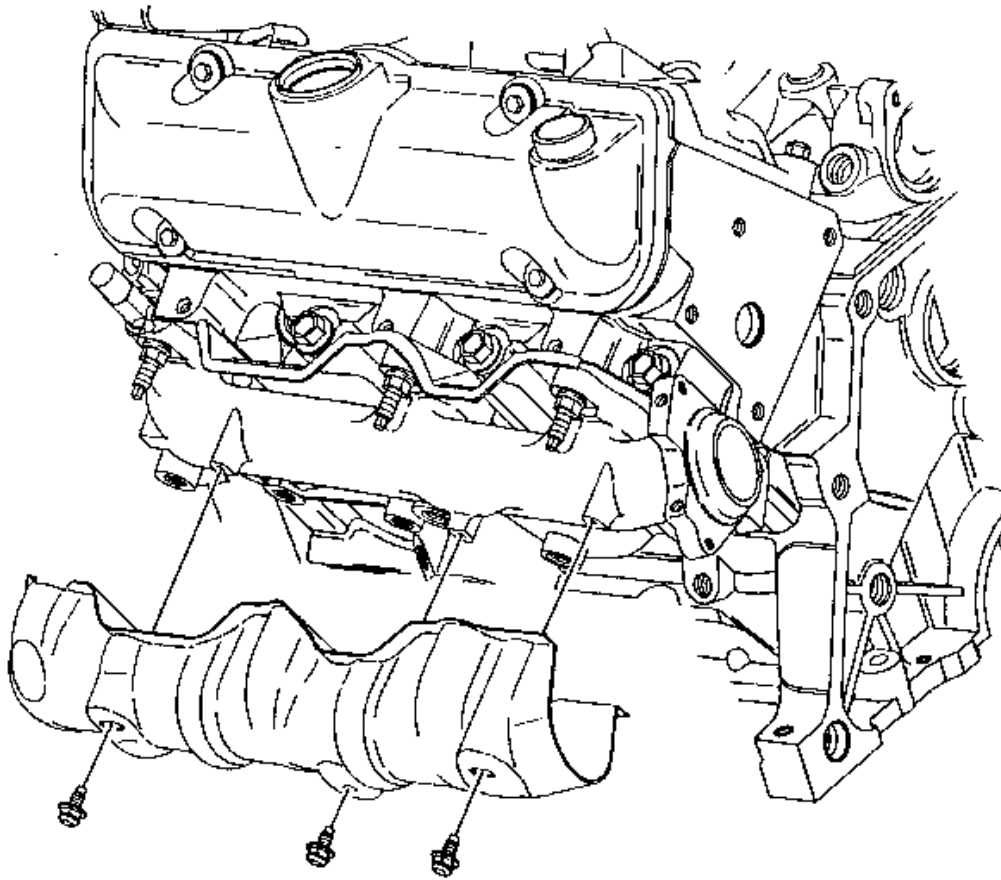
View Of Exhaust Manifold Heat Shield & Bolts - Left
